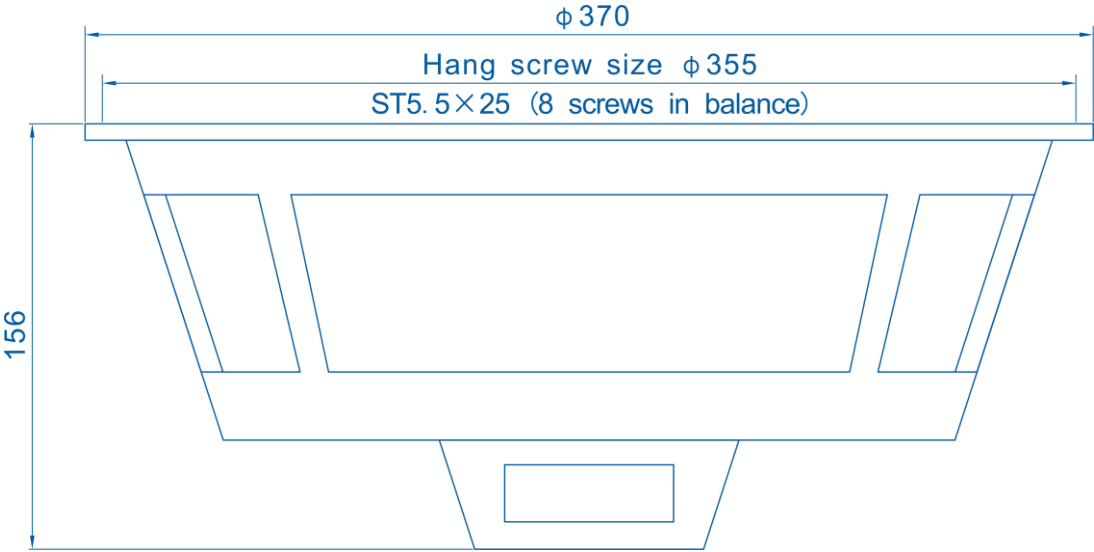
Dimension of Rudder Angle Indication Unit AD801
